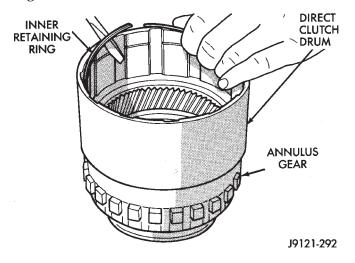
Removing Clutch Drum Inner Retaining Ring
